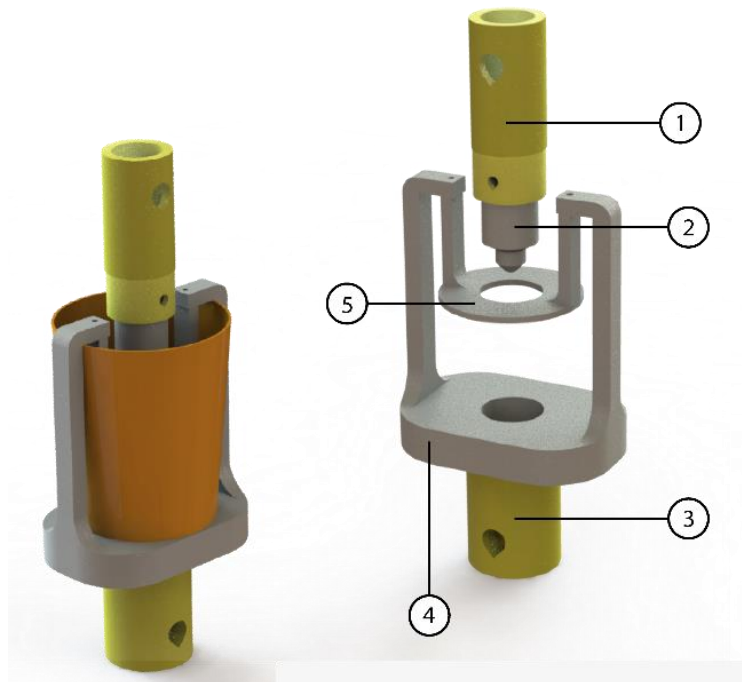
Rendering of the final setup selected, with and without the pot. The setup consists of five components: Part 1 (Connector), which links directly to the tensile machine and extends into Part 2 (Grip), designed to hold the root securely. Part 3 (Stabilizing Connector) locks the base plate (Part 4) in place, ensuring stability, while Part 5 (Retainer) holds the soil within the pot, preventing any uplifting during testing. All components are securely connected using screws or rivets.
